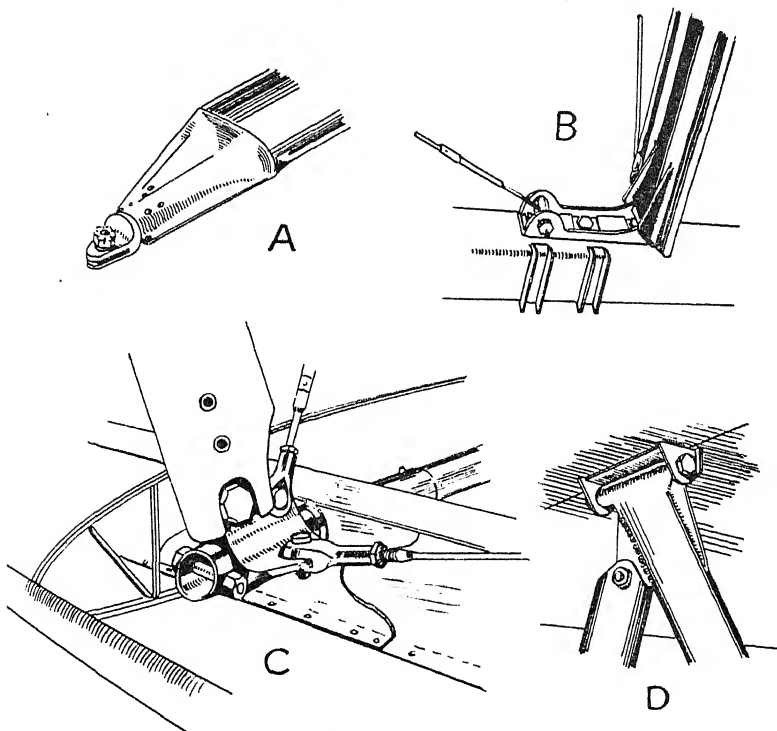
END ATTACHMENTS OF STREAMLINE TUBE STRUTS
